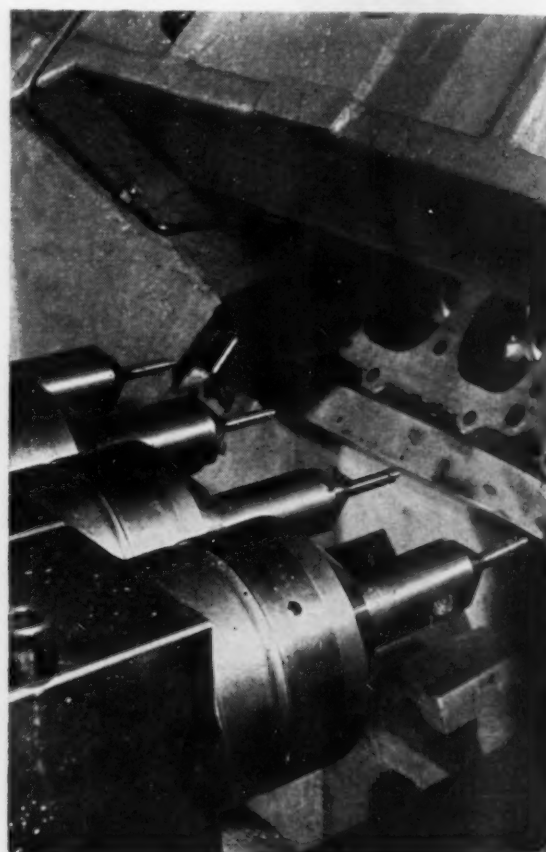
Four boring tools used at first station of cylinder head transfer machine. Carbide tipped tools on end of holders final bore pressed-in valve guide bushings.
